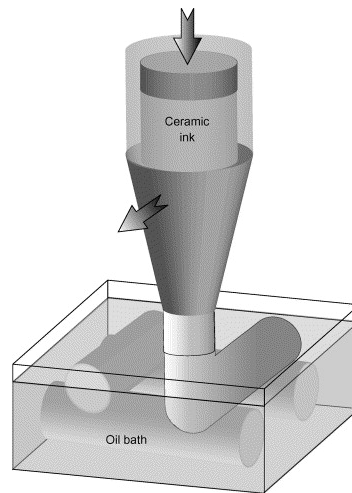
Schematic of robocasting fabrication process (Dimensions not to scale). The ceramic part is built layer-by-layer from a computer design. A three-axis robotic arm moves the injection syringe while pressing the ceramic ink through the conical deposition nozzles, immersed in an oil bath, to create a self-supporting 3-D network [38].
